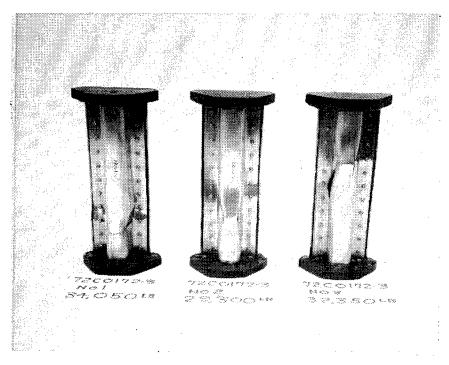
Failed Riveted Crippling Specimen Showing Fracture of the Boron Aluminum Stringer (Neg. 126984B)
